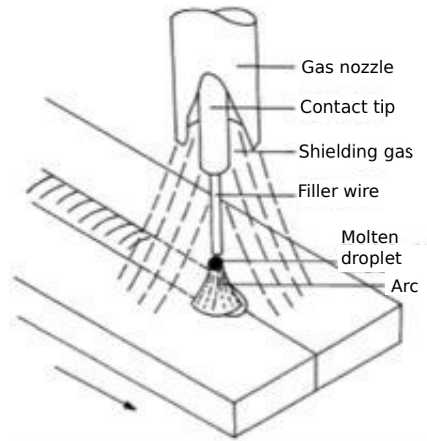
Illustration of MIG welding (After Norrish, 1992).
